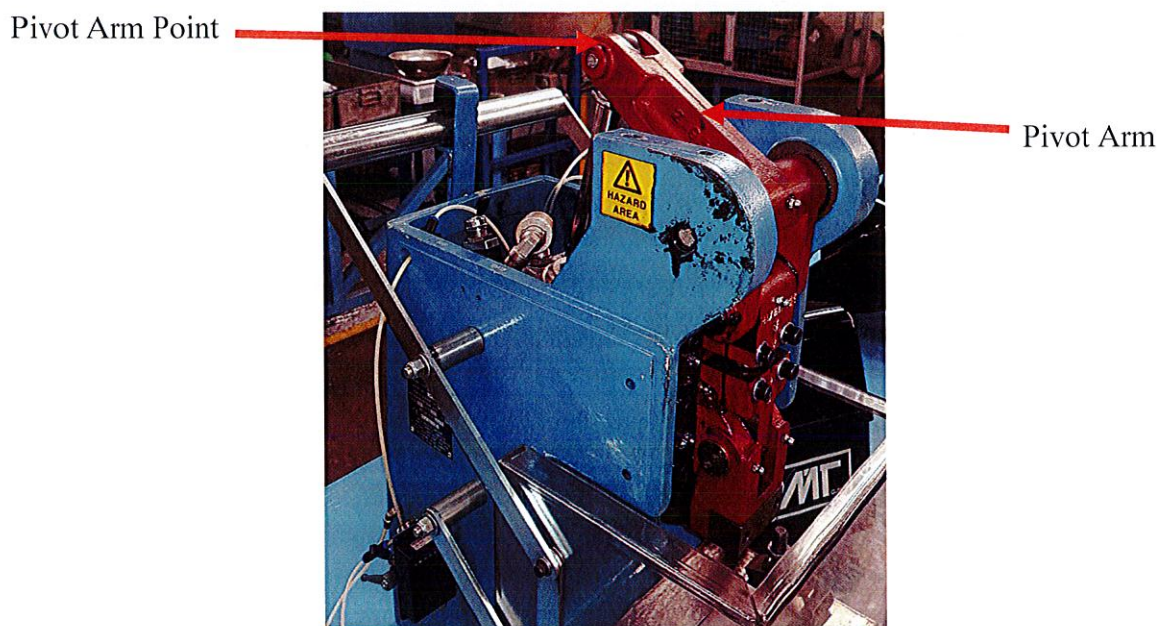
Showing the hood off the press top allowing access to the pivot arm.
